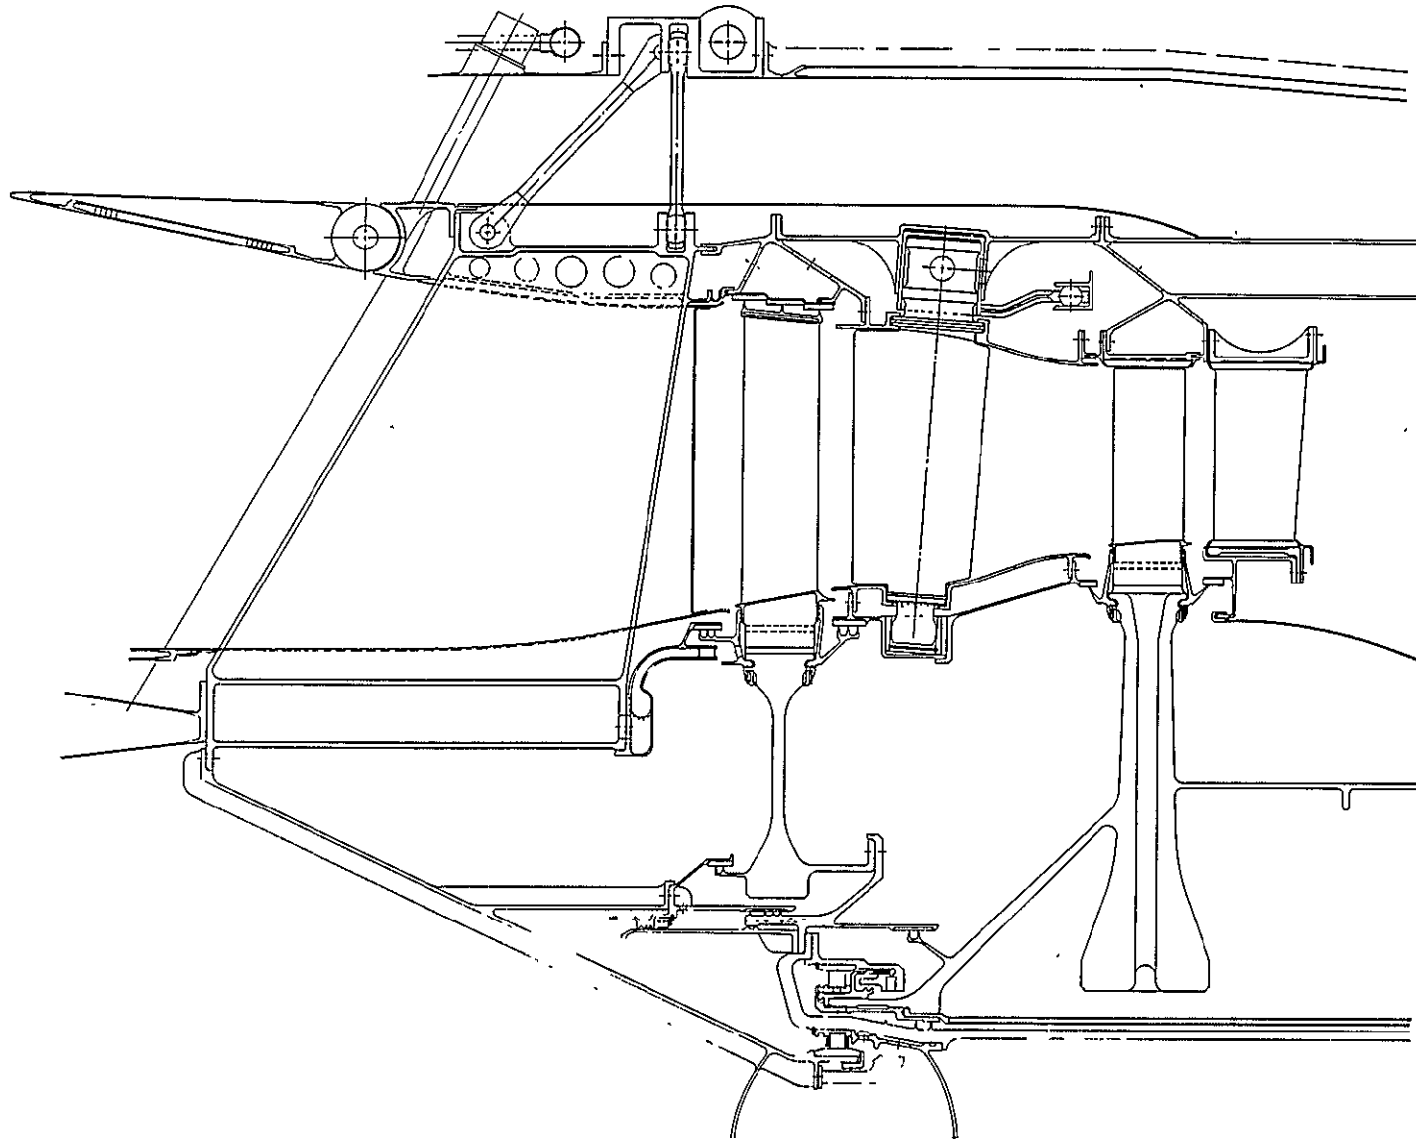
AST Turbine Components - Preliminary Mechanical Layout.
